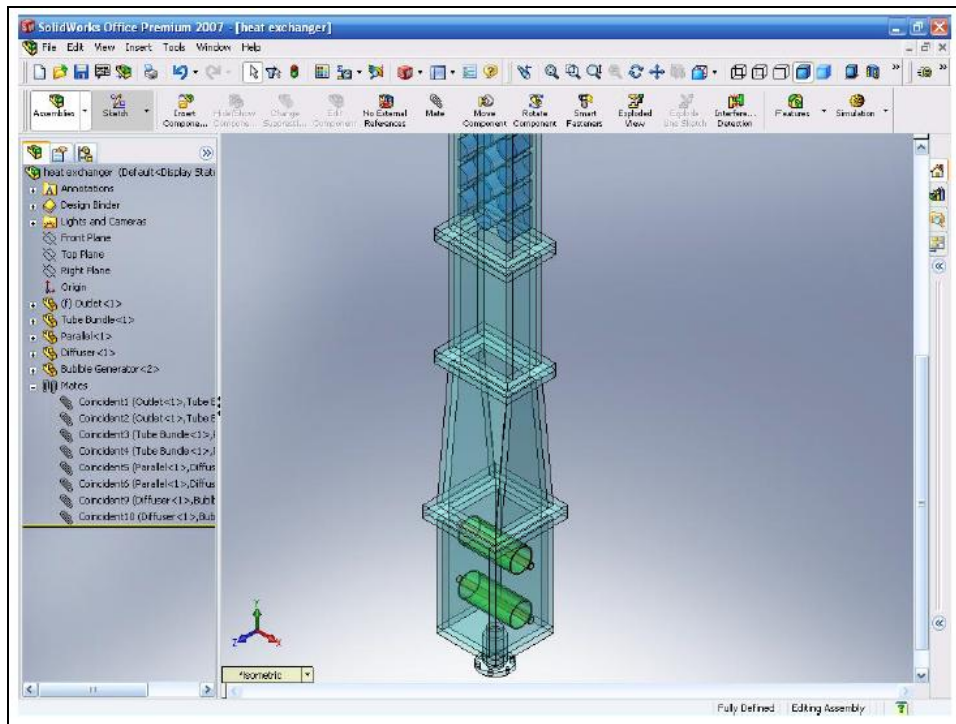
Assembly drawing of test section 38 mm in diameter in-line bundle, bubble generator, convergent section and settling length
